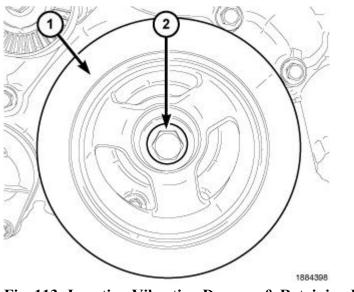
Locating Vibration Damper & Retaining Bolt Courtesy of CHRYSLER LLC
